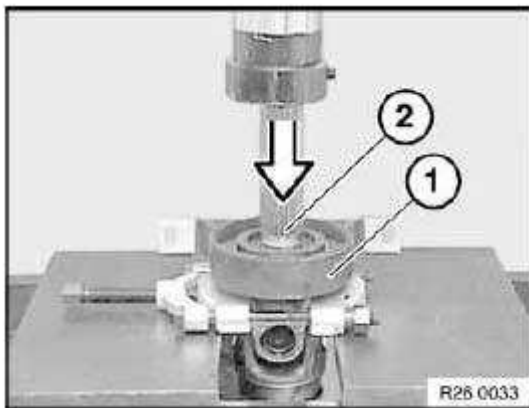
Pressing Center Bearing Off Propeller Shaft Using Hydraulic Press
